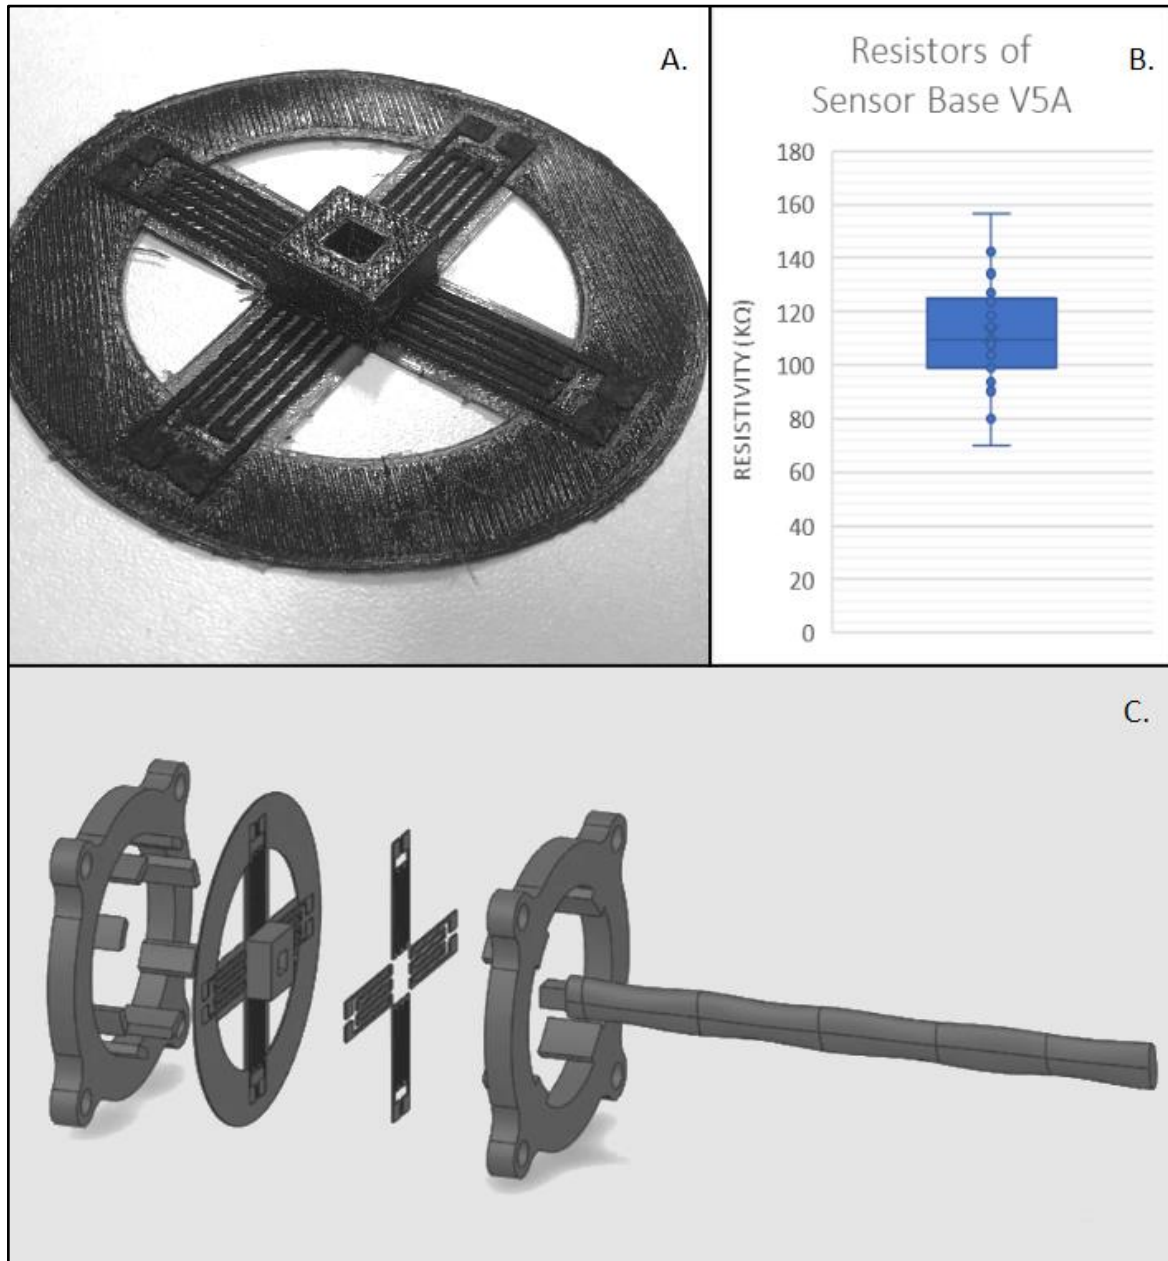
A: The membrane and sensors in final configuration. B: Boxplot showing the measured resistivity at rest for all 32 tested sensor gauges. C: Exploded view of the final model.
